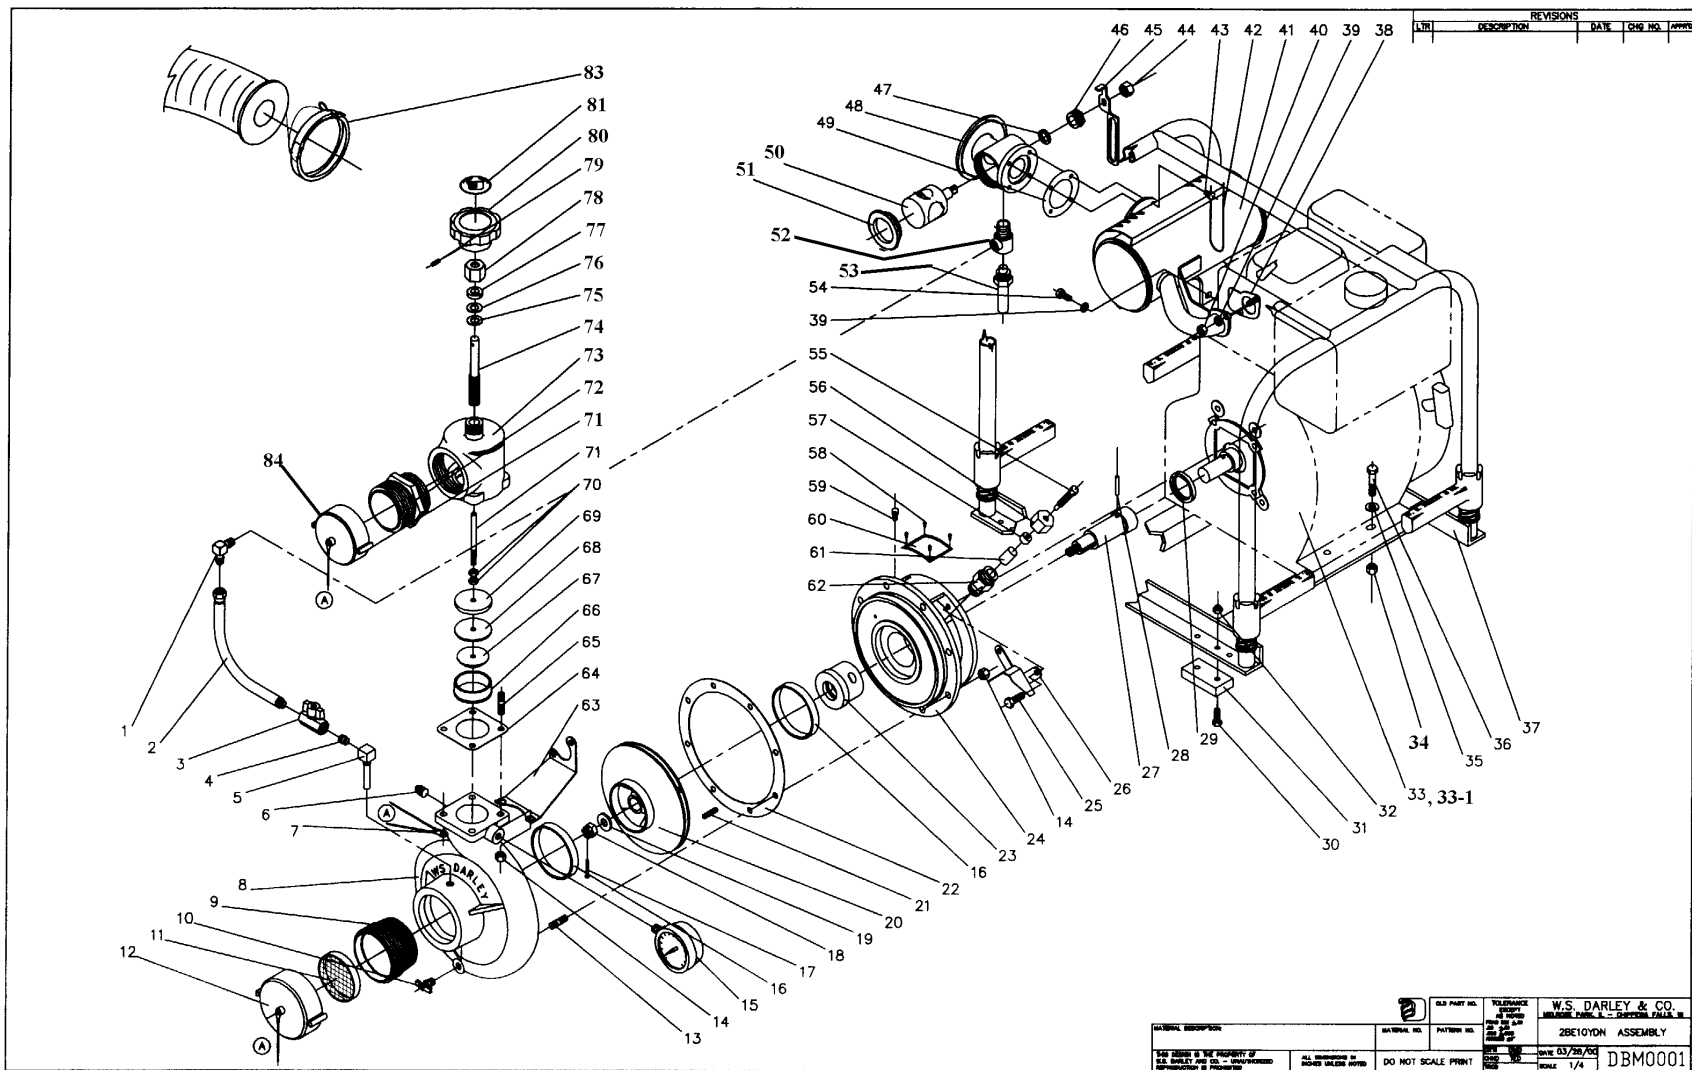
PUMP UNIT EXPLODED VIEW DRAWING DBM0001
